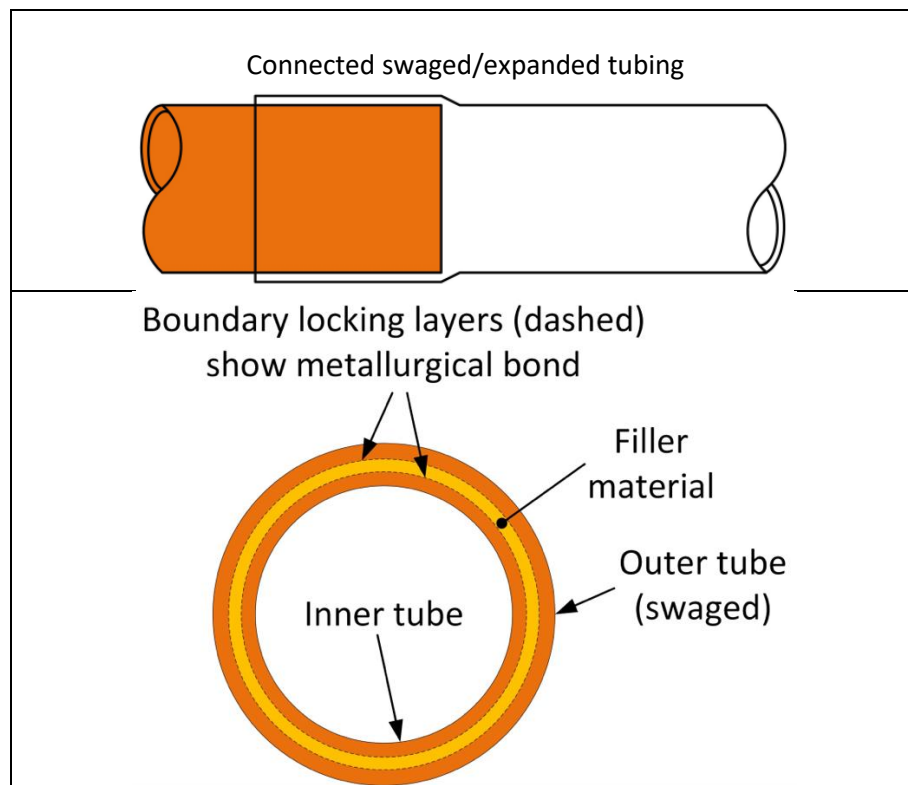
Swaged or expanded tubing design shape (Source: HEAT GmbH)
